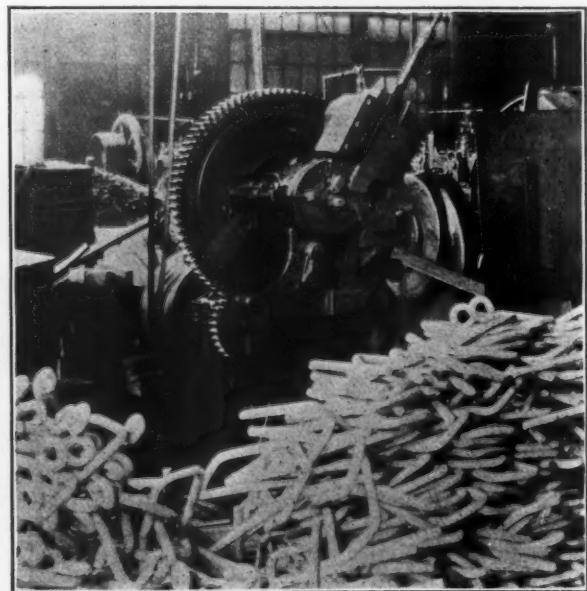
EYE-BOLT MACHINE FOR BENDING THE ENDS OF THE BRAKE HANGERS.
